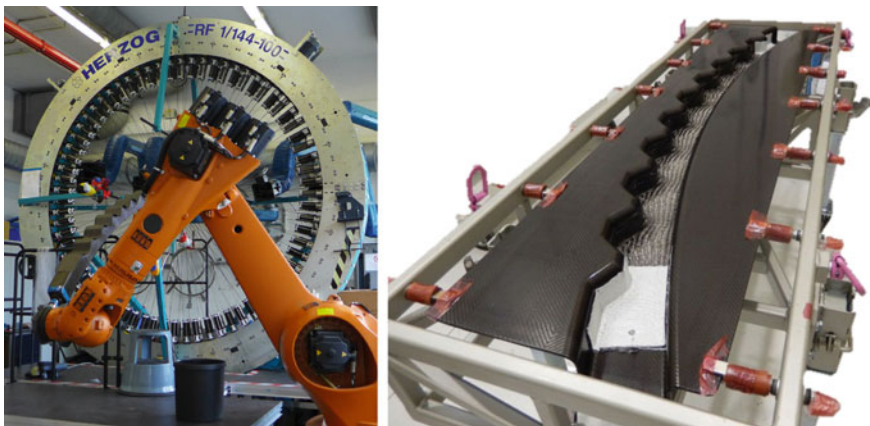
Robot braiding device (*left*), frame mould tool (*right*)
